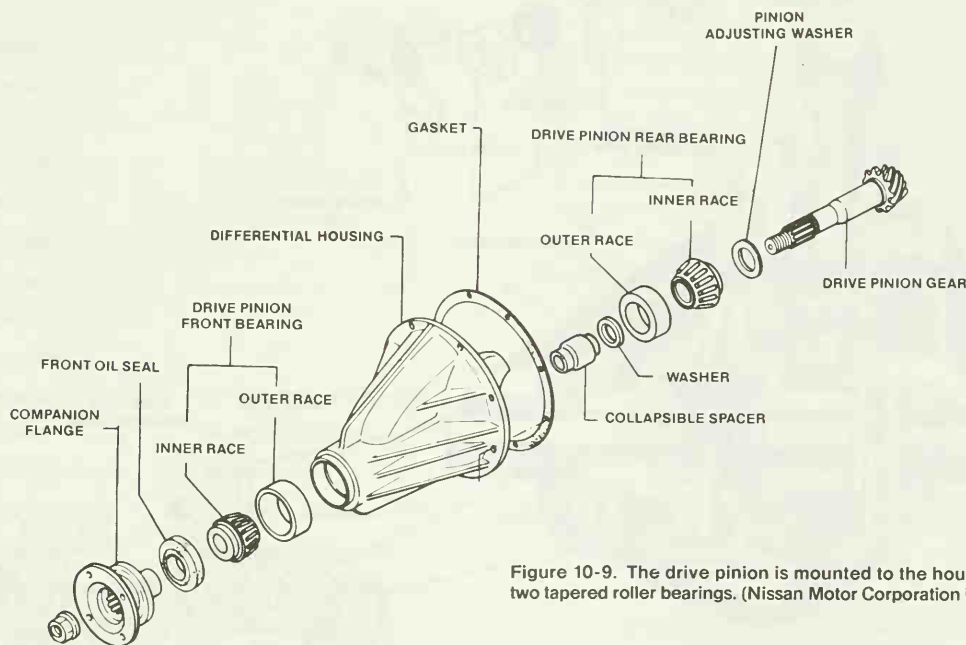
The drive pinion is mounted to the housing on two tapered roller bearings. (Nissan Motor Corporation in USA)
